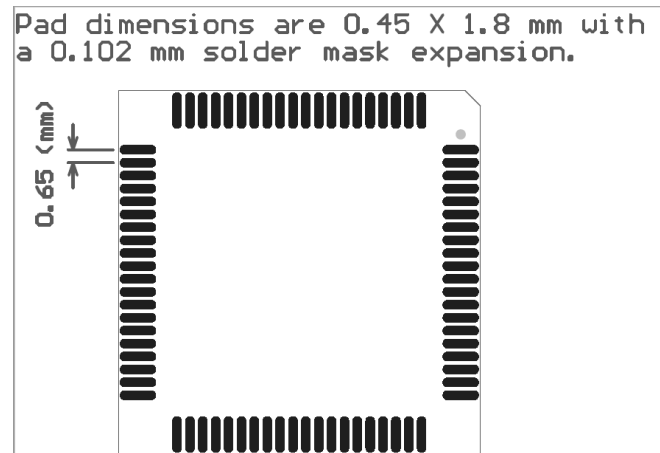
QFP 80 Laminate Dummy Pad Dimensions
